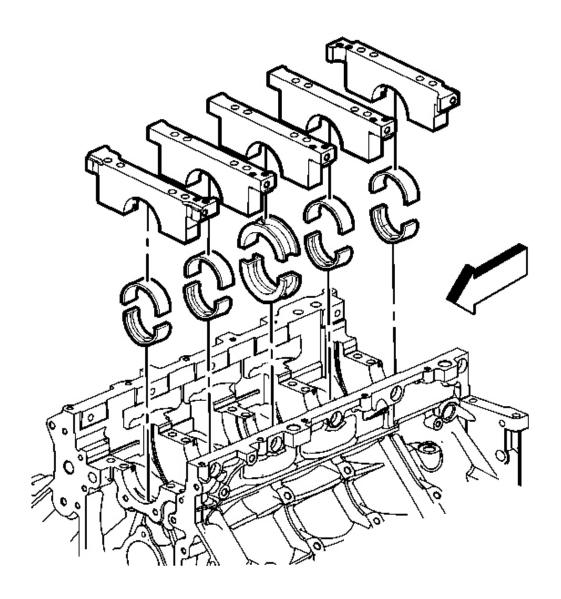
View Of Crankshaft Bearings & Bearing Caps Courtesy of GENERAL MOTORS CORP.
